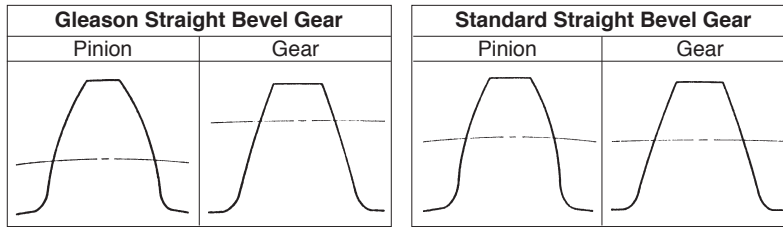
The Tooth Profile of Straight Bevel Gears
